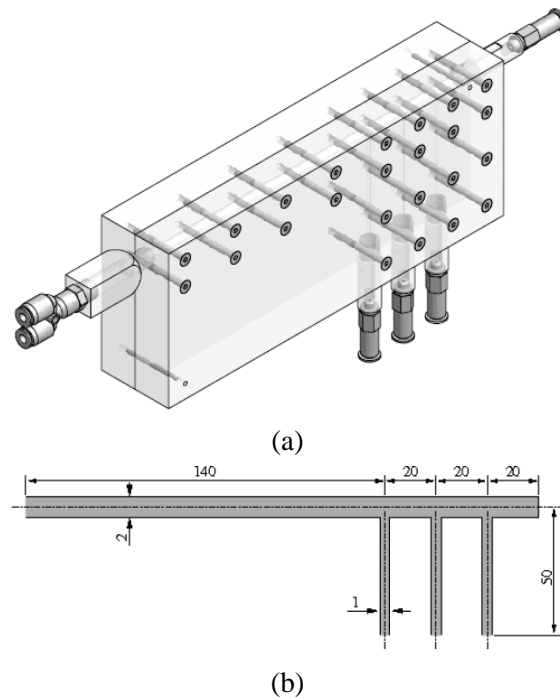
(a) Test section and (b) manifold geometry; half-circular cross section.
